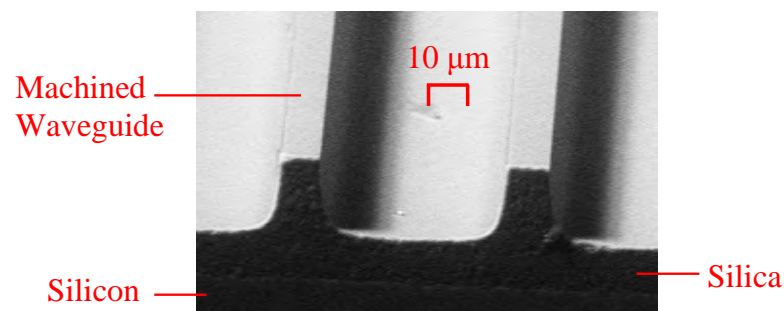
Waveguide fabricated using ultra-precision machining technique
